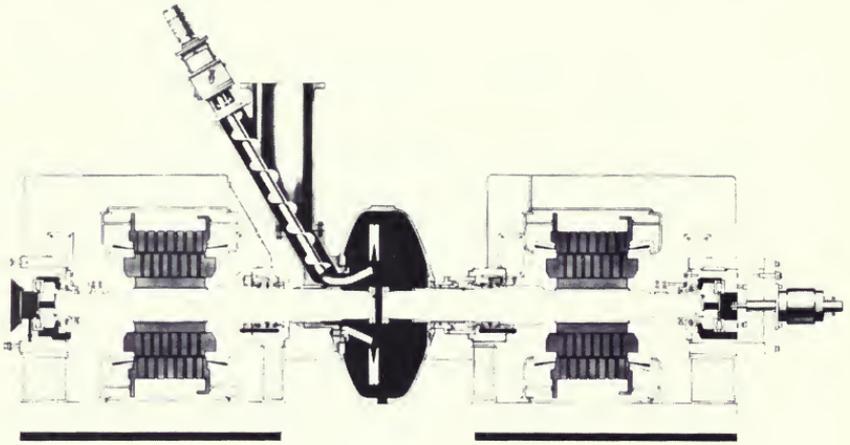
Twin-screw feeder. (Drawing courtesy of The Bauer Bros. Co.)
